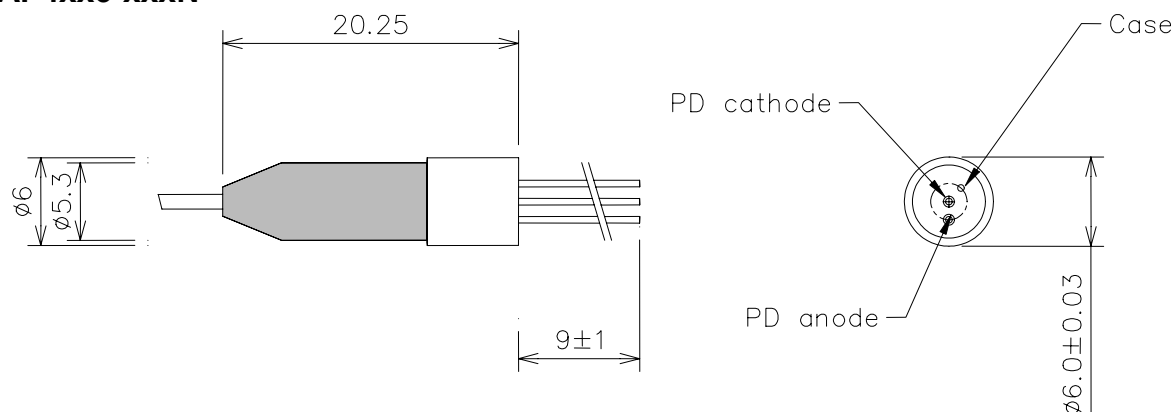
Pigtailed PD Package Dimensions [unit: mm]
